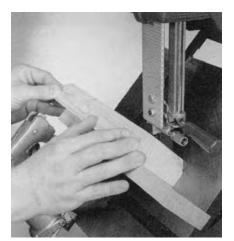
This is how to use the V-block arrangement to cut chamfers. The table tilt will determine the angle of the chamfer. The miter gauge with an extension supports the stock.
